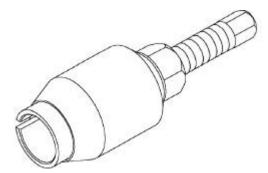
REMOVER, SEAL - 8511 Courtesy of CHRYSLER LLC
